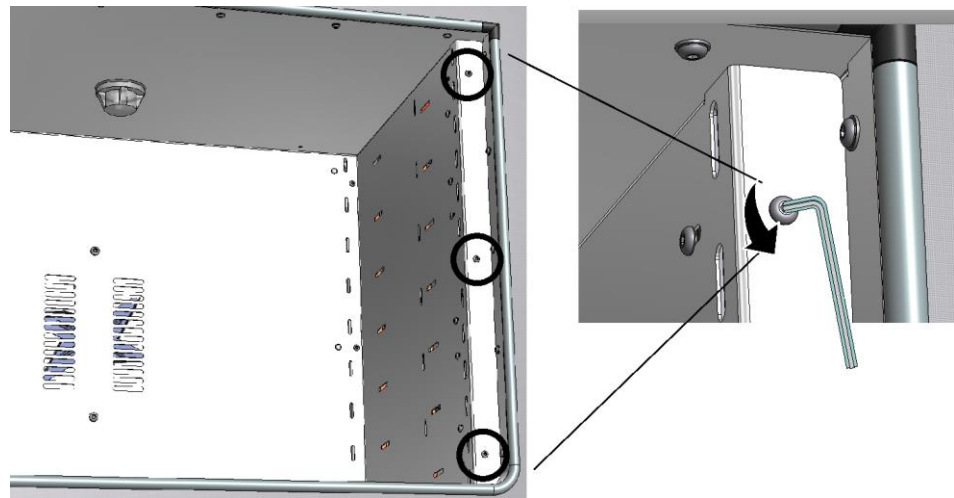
Unscrewing the screws on the side walls (similar to picture)
